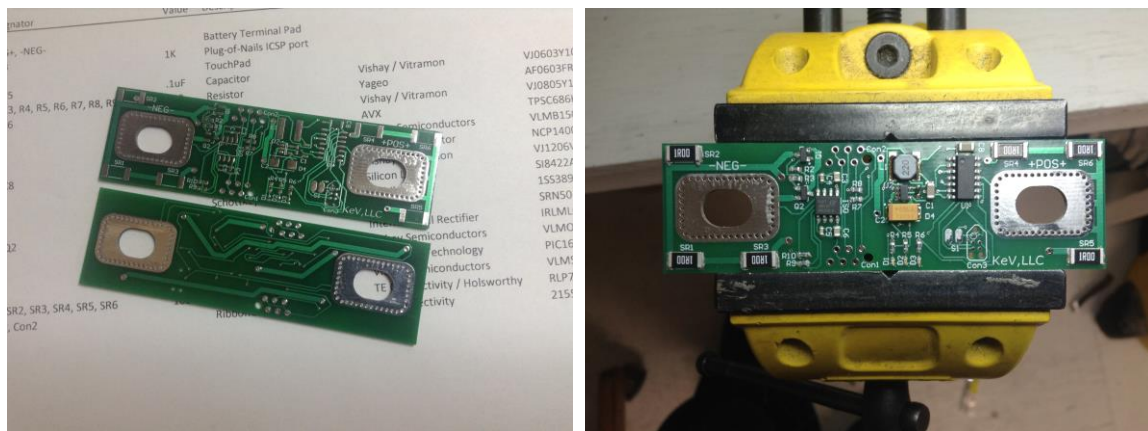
Prototype BMS PCB (Left). Assembled prototype (Right)
